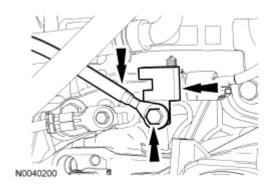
Locating Control Cables Courtesy of FORD MOTOR CO.
